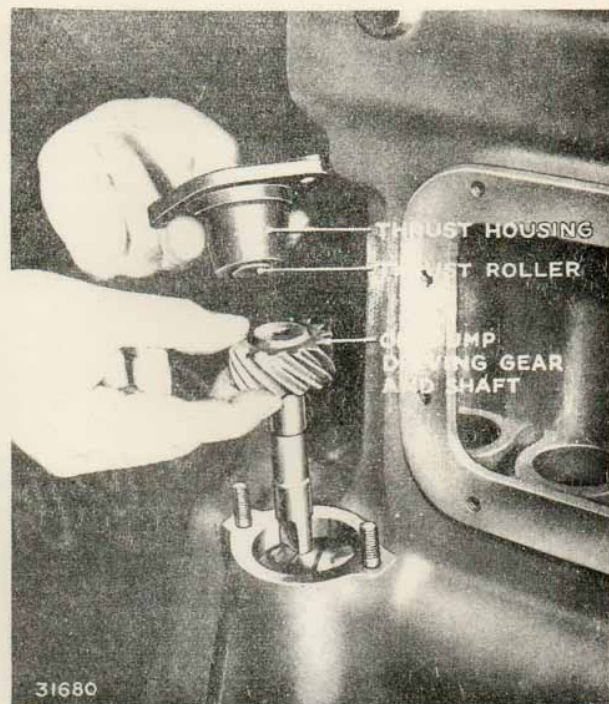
FITTING OIL PUMP DRIVE GEAR AND THRUST HOUSING (Engine in Stand)
